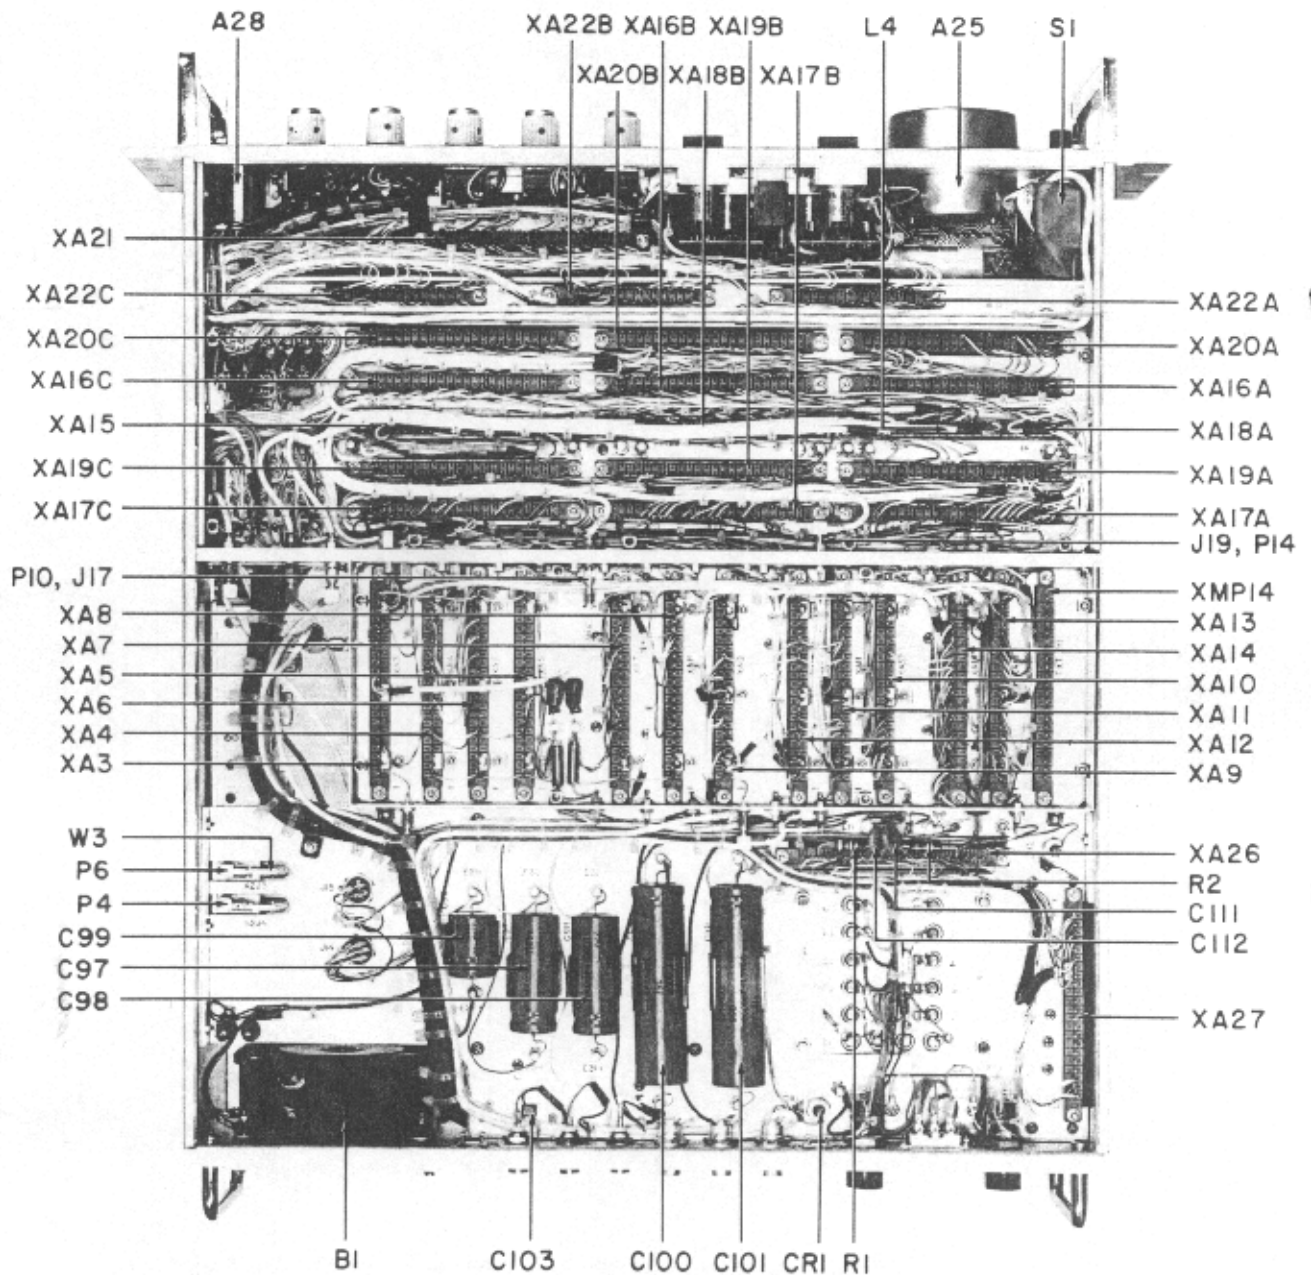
Type WJ-8888 Receiver, Bottom View, Location of Components
